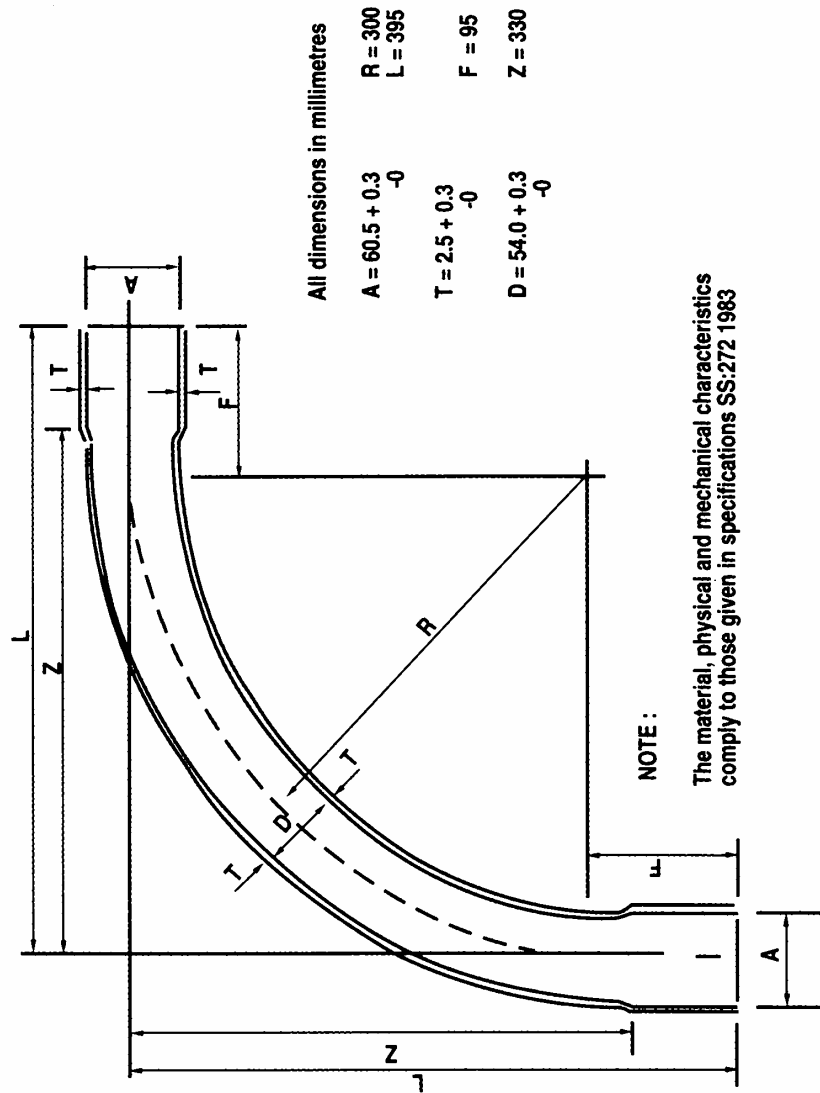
(c): DETAILS OF LEAD-IN PIPES WITH BEND PIPES
